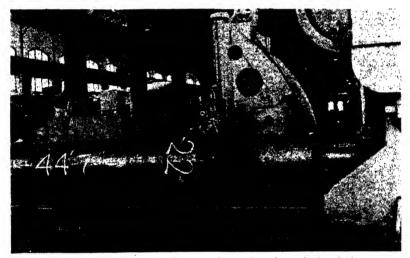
Close-up of a slotter tool squaring the end of a shaft.
